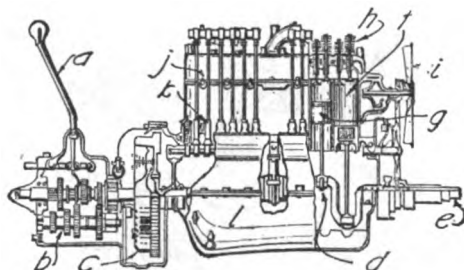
Section of a typical 6-cylinder engine showing important parts: *a* transmission lever; *b* sliding gear, selective transmission; *c* flywheel, and cone clutch combined; *d*, *e* crankshaft; *f* cylinder with valves (*h*) in head; *g* piston; *i* fan of cooling system; *j* spark plug; *k* rod operated by secondary shaft operating valve.
